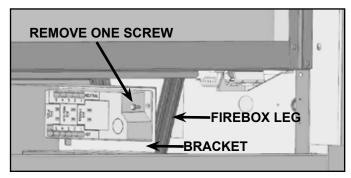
Junction Box Detail - RAVE4013-IFT
